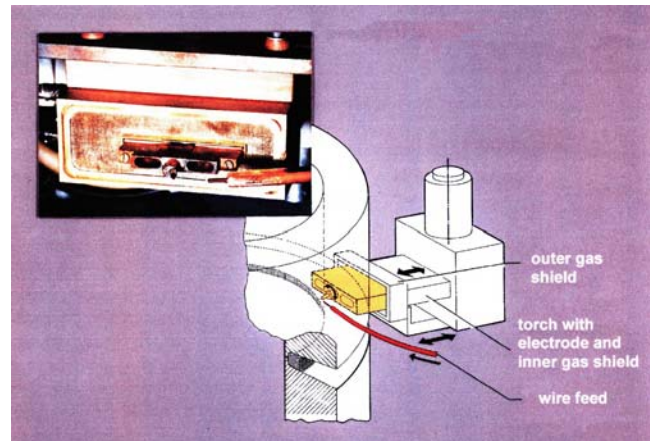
Schematic sketch of TIG Narrow Gap Hybrid welding
